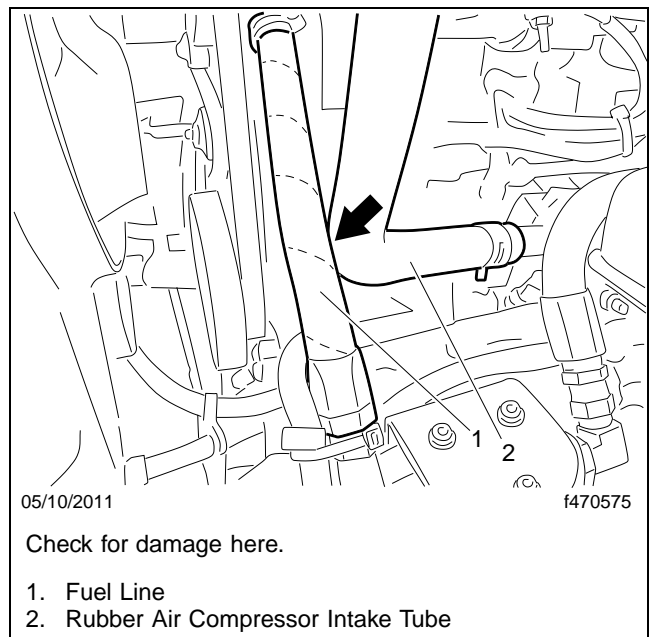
, Fuel Line and Rubber Air Compressor Intake Tube Contact Area
